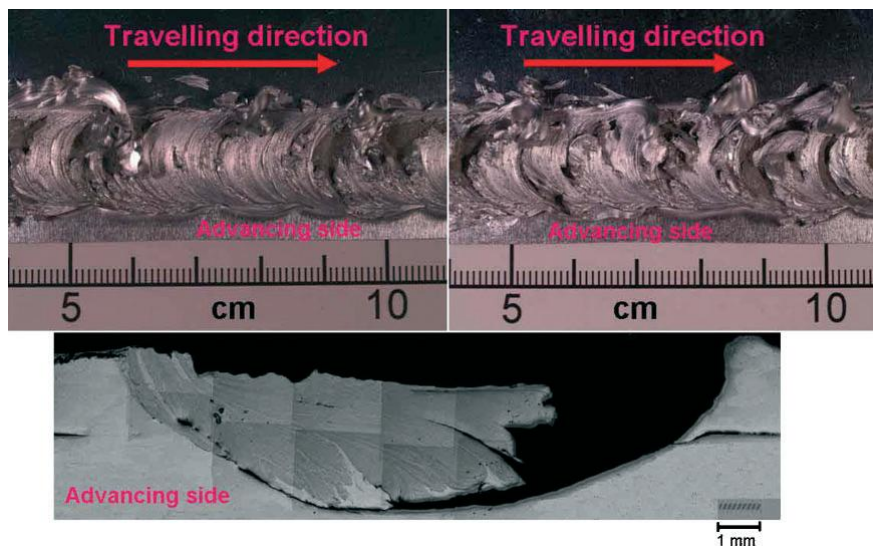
Macrographs of FSP zones fabricated with circular probe tools at 1500 rev min⁻¹ rotational speed. (a) top view of surface for pin 3 mm in diameter, (b) top view of surface for pin 7 mm in diameter pin, (c) cross section view [53].
